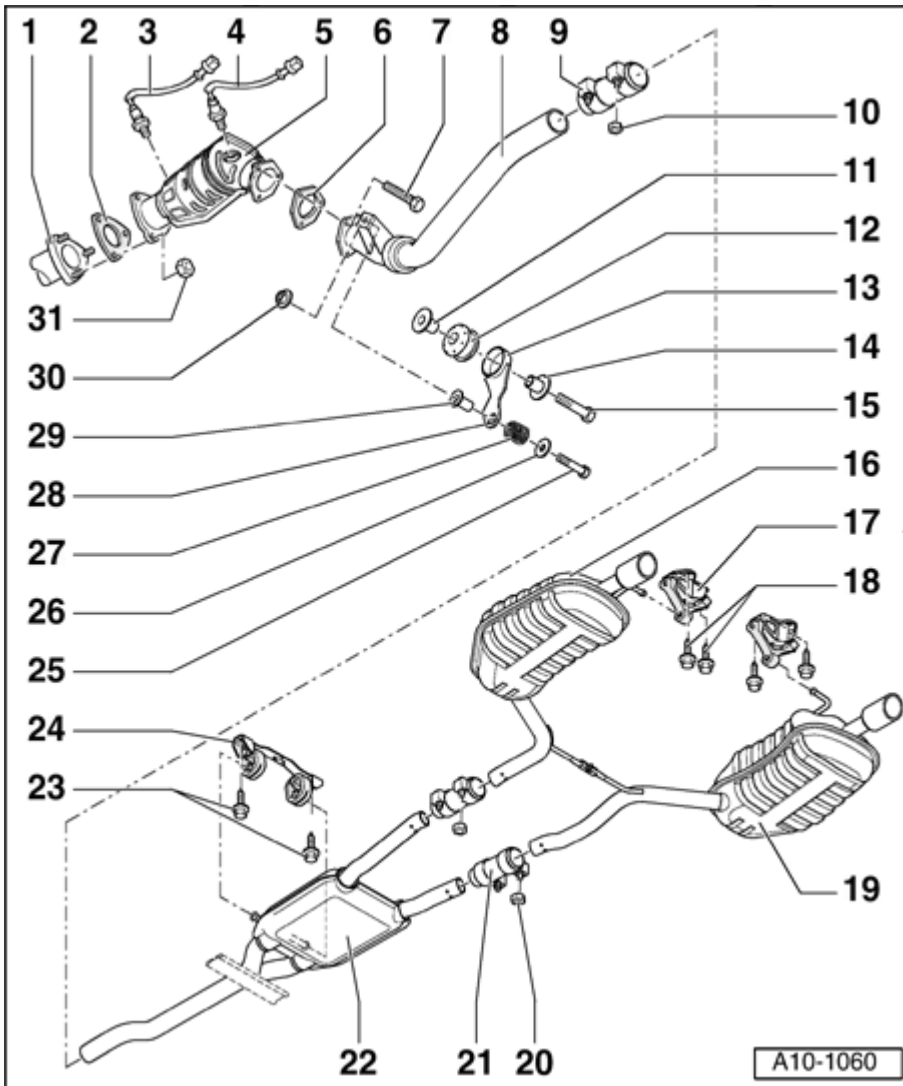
Exhaust System Components, Removing And Installing (All Wheel Drive Vehicles)
